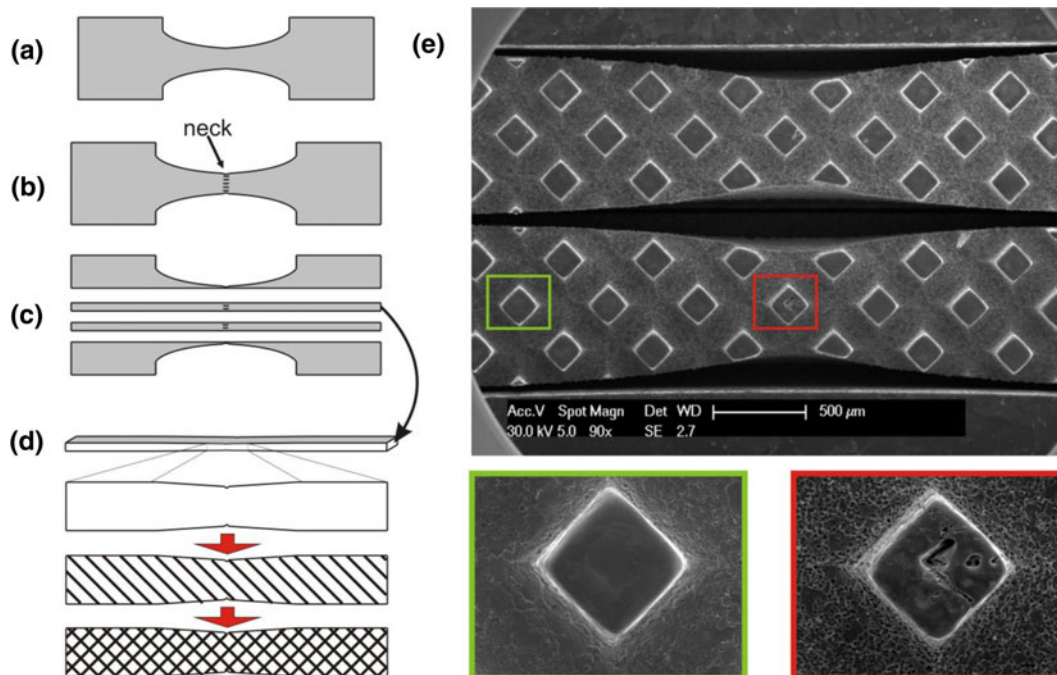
The experimental methodology starts with tensile specimens (a) that are tested to the point of fracture. (b) The deformed samples are cut into four pieces along their central axis with three wire EDM cuts (c), followed by two perpendicular sets of wire EDM cuts on the cross section at 45 deg with the tensile direction (d) to produce the field of micropillars shown in (e). Note the microvoids visible at the top of pillars located at highly deformed regions around the neck.
